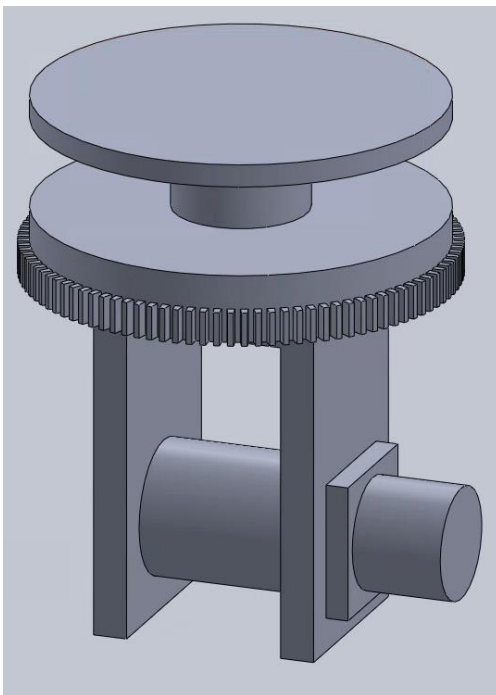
Wheel bracket showing where the drive motor is mounted onto the side of the bracket.
